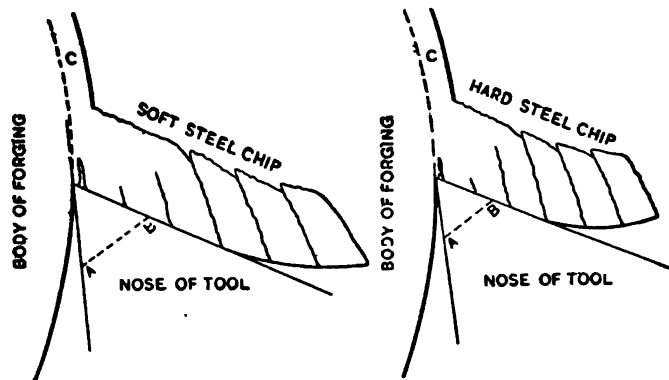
How hard and soft chips bear upon the lip surface of tool. The soft chip covers a much larger area of the lip surface.
